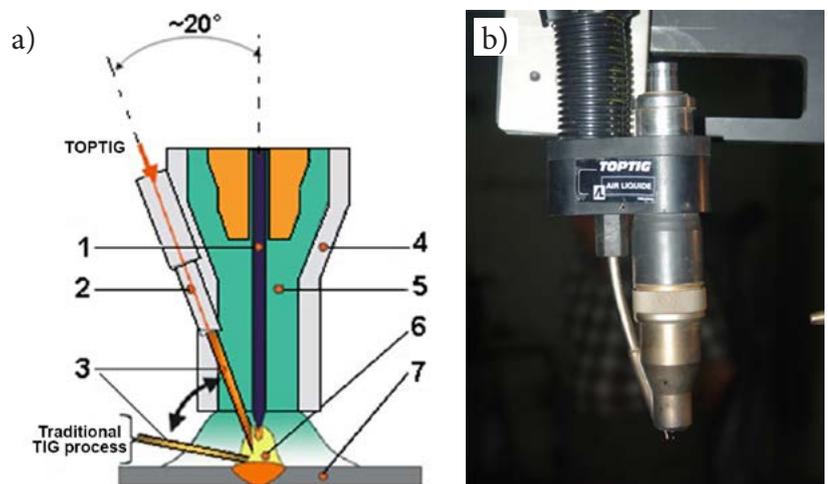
(a) - Standard TIG welding torch with side wire feeding and TOPTIG welding torch: 1: tungsten electrode, 2: wire feeding conduit, 3: electrode wire, 4: gas nozzle, 5: shielding gas, 6: electric arc, 7: element being welded; (b) - TOPTIG welding torch
